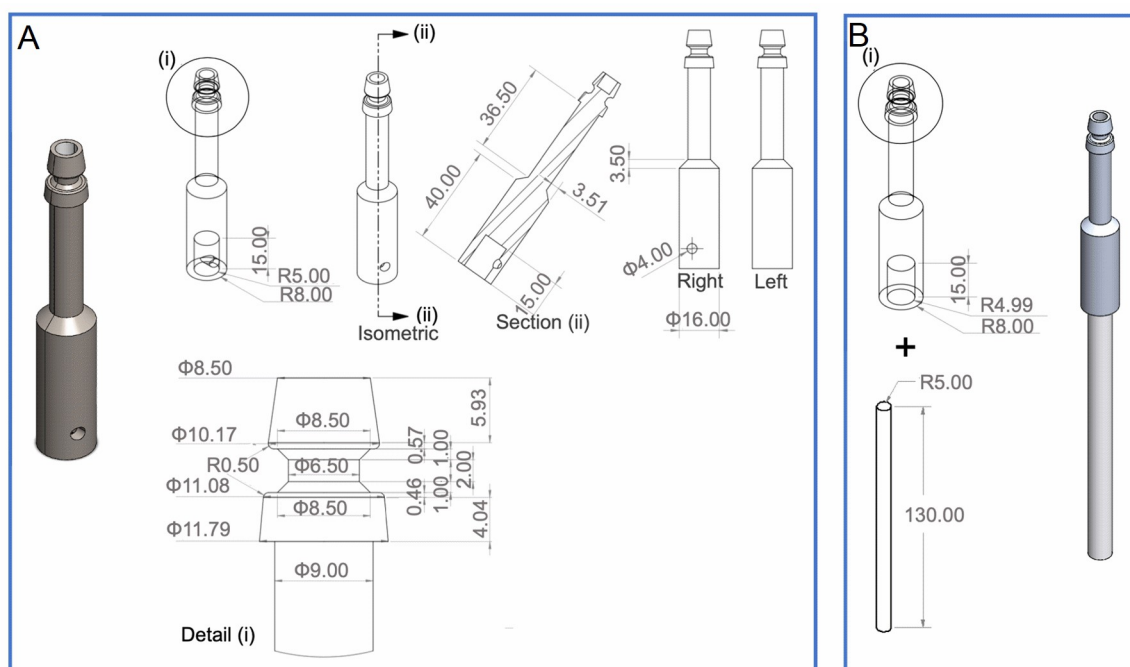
Magnetorheometry measuring probe. (A) Stainless steel shaft used with disposable screwed-in probes of different materials; (B) Shrink-fitted stainless steel shaft with ceramic (MACOR) probe. All dimensions in millimetres.
